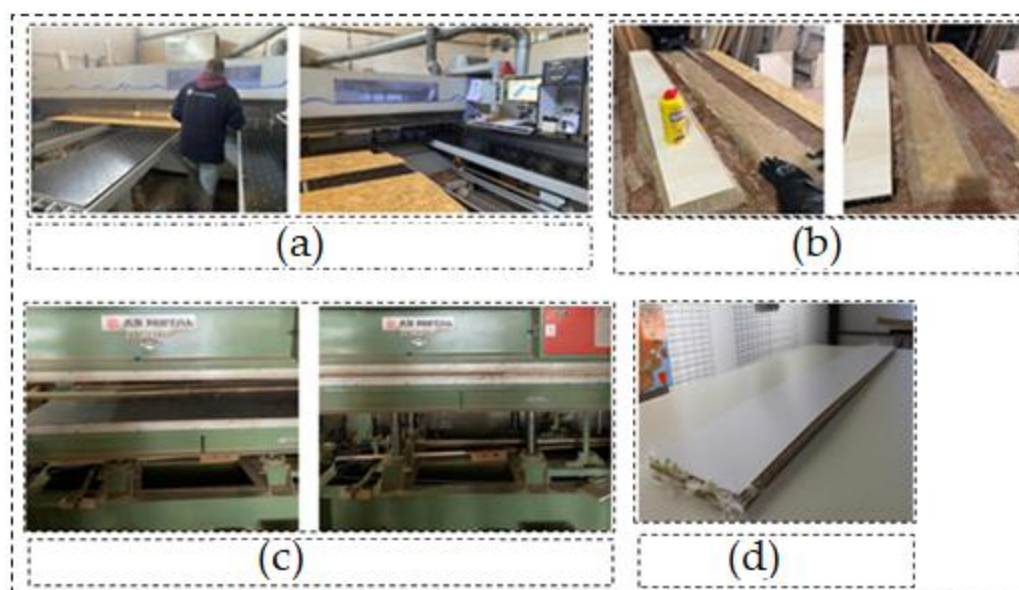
The production process of test samples: (a) using a CNC machine; (b) polyurethane adhesive was used for surface; (c) Hydraulic Veneer SSP-80; ASMETAL; (d) the pressing of samples.
